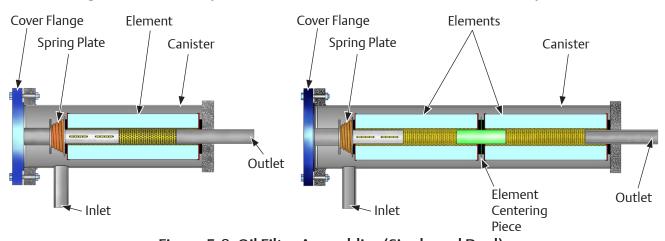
Oil Filter Assemblies (Single and Dual)
